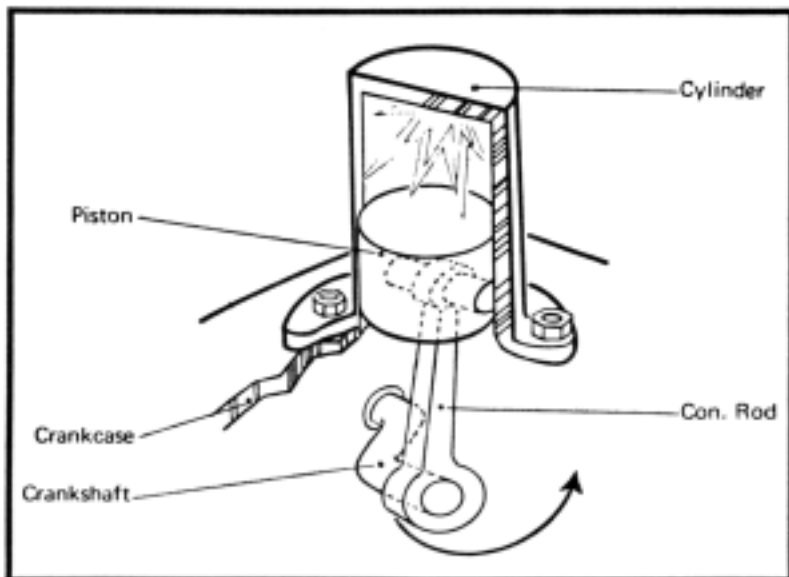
Basic engine nomenclature. (Courtesy Pacific Basin Trading Co.)
